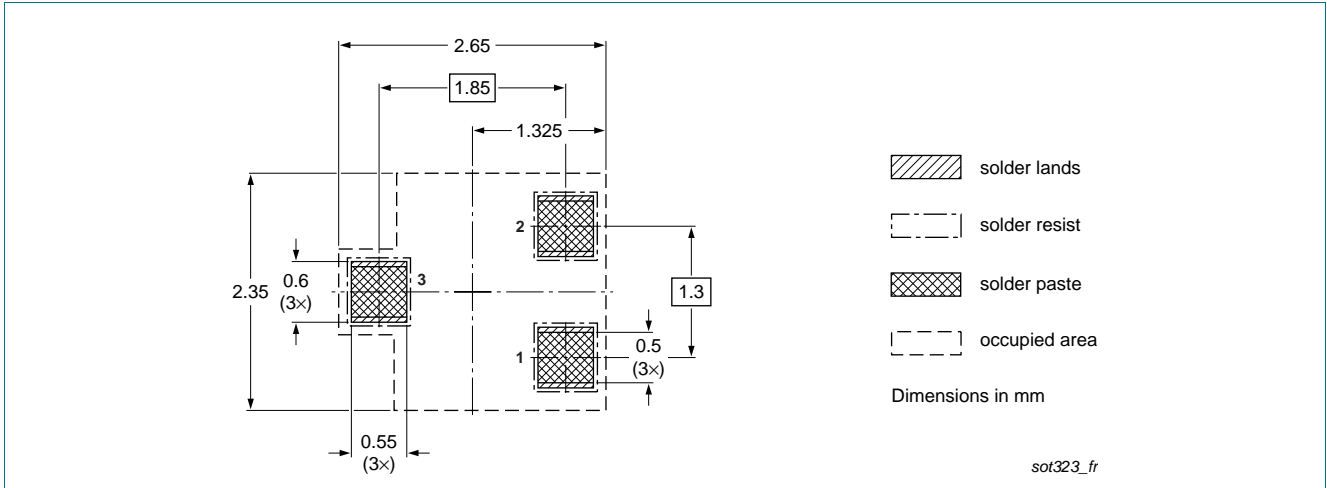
Reflow soldering footprint for SOT323 (SC-70)
